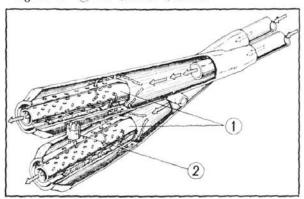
① Exhaust muffler ② Muffler connecting tube
